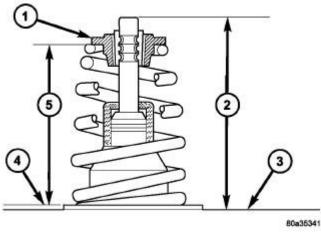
VALVE SPRING INSTALLED Courtesy of CHRYSLER LLC
